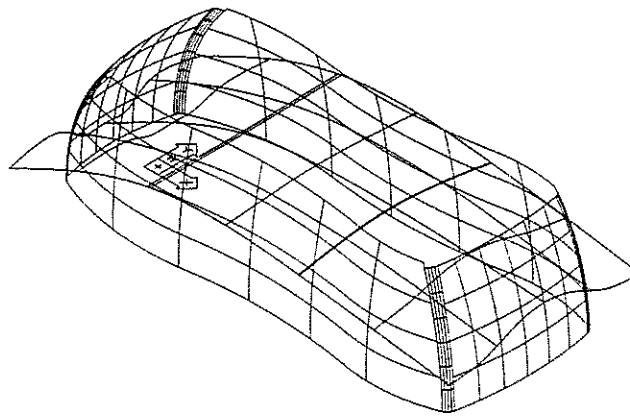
Loft uv surface constructed, surfaces unhidden
